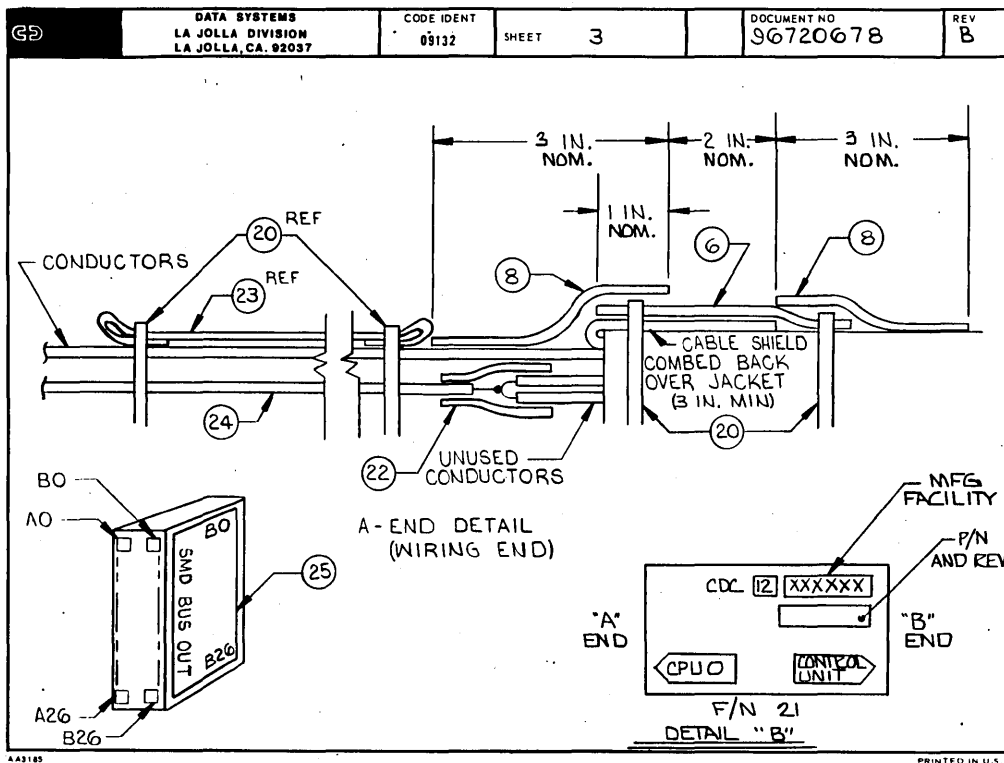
Cable Assembly - Module Drive Bus Out (Sheet 1 of 4)
